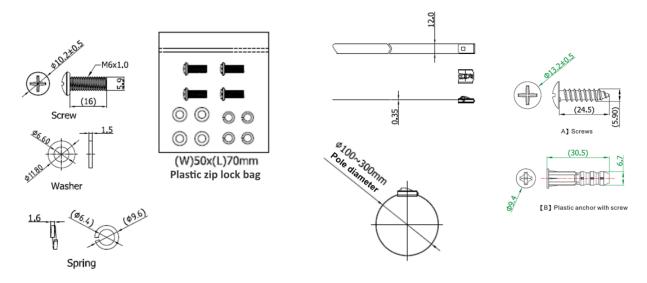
Mechanical drawings: screw, spring washer, washer, hose clamp, anchor & screw
